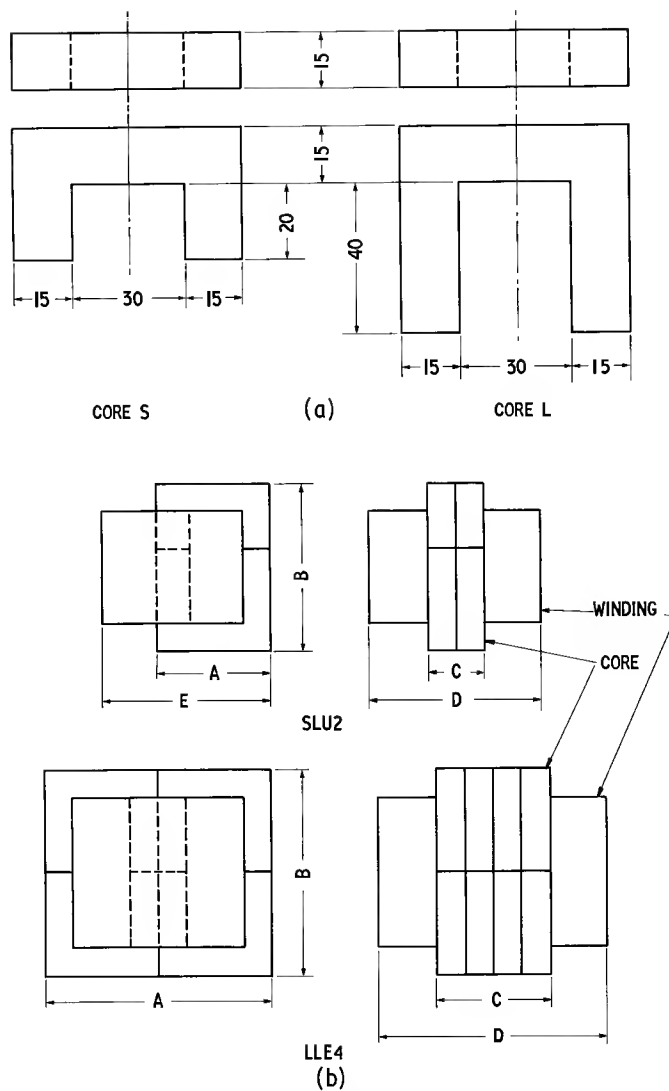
Unit U cores. (a) Dimensions of the two unit cores, in mm. (b) Definition of overall dimension symbols used in Table 9.3, and illustration of assembly code.
